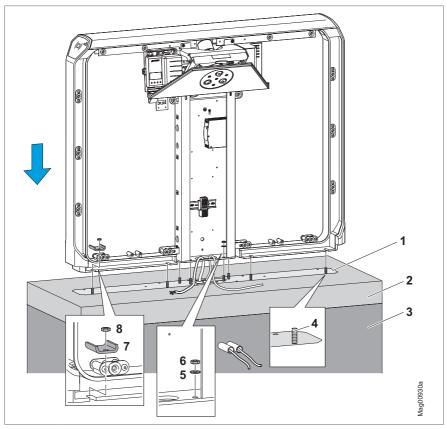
Mounting variant 2, shown here mTripod FMTP-ML
